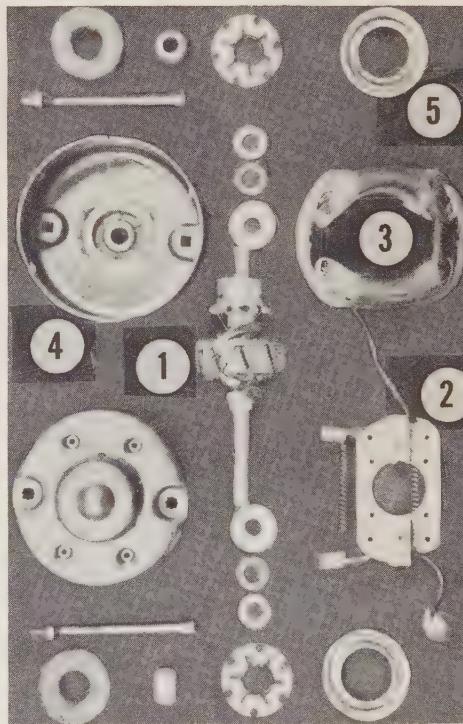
The principal components of a typical automotive accessory motor investigated as possible sources of noise were: (1) armature assembly (commutator windings, stack, shaft, oil slingers, and washers); (2) brush holder assembly (brushes, brush springs, brush holders, brush plate, and terminal); (3) field stack and field windings; (4) end cases and tie bolts; and (5) bearings, bearing retainers, and oil wicks.
